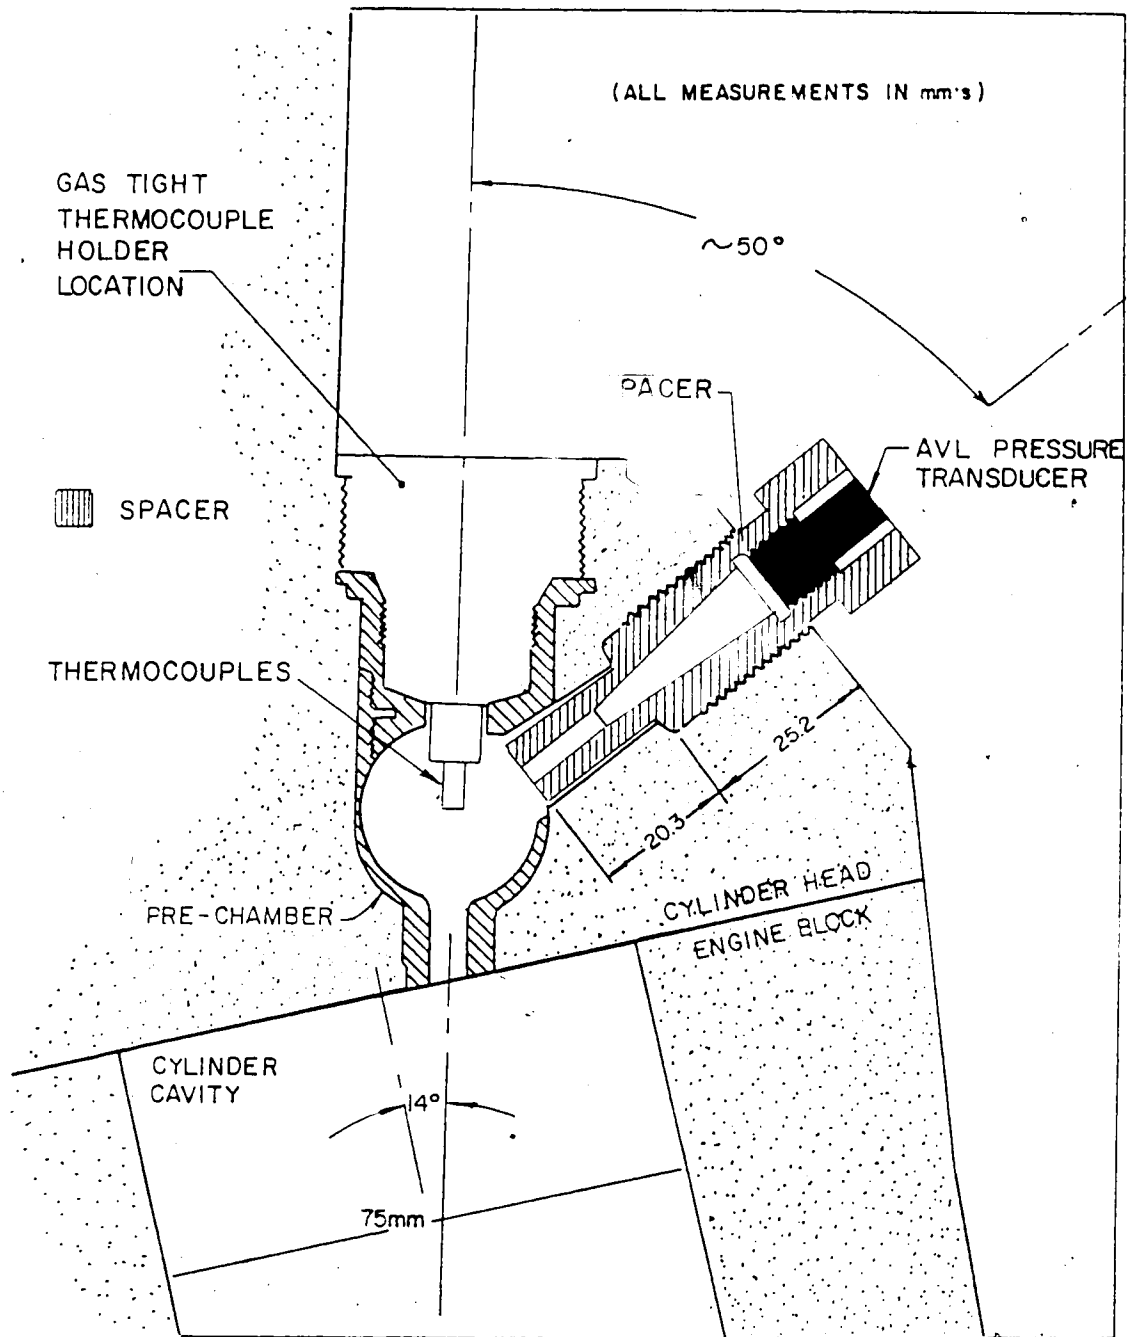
Cross-section of Engine Showing Location of Thermocouples and Pressure Transducer
